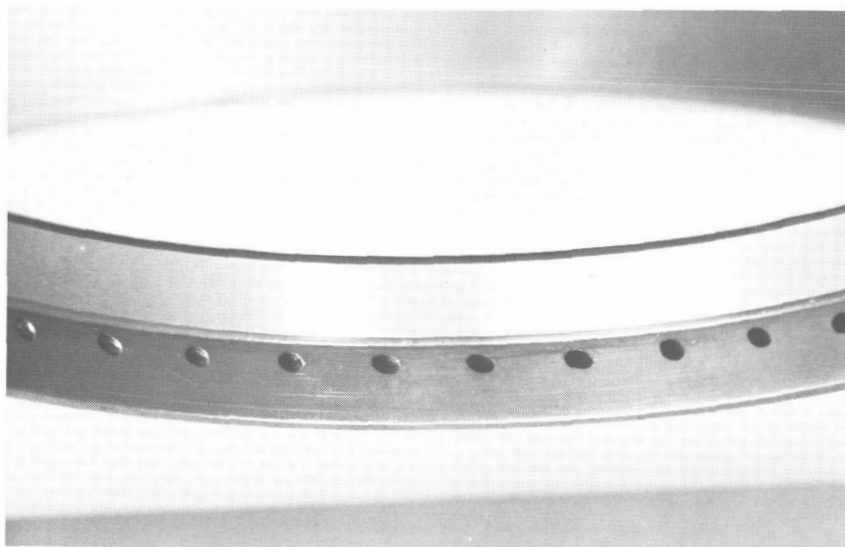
Mainshaft Seal Rig 29360 - Rear View of the Oil Cooled Seal Plate Showing Oil Scoop With the Enlarged Oil Inlet Holes.
